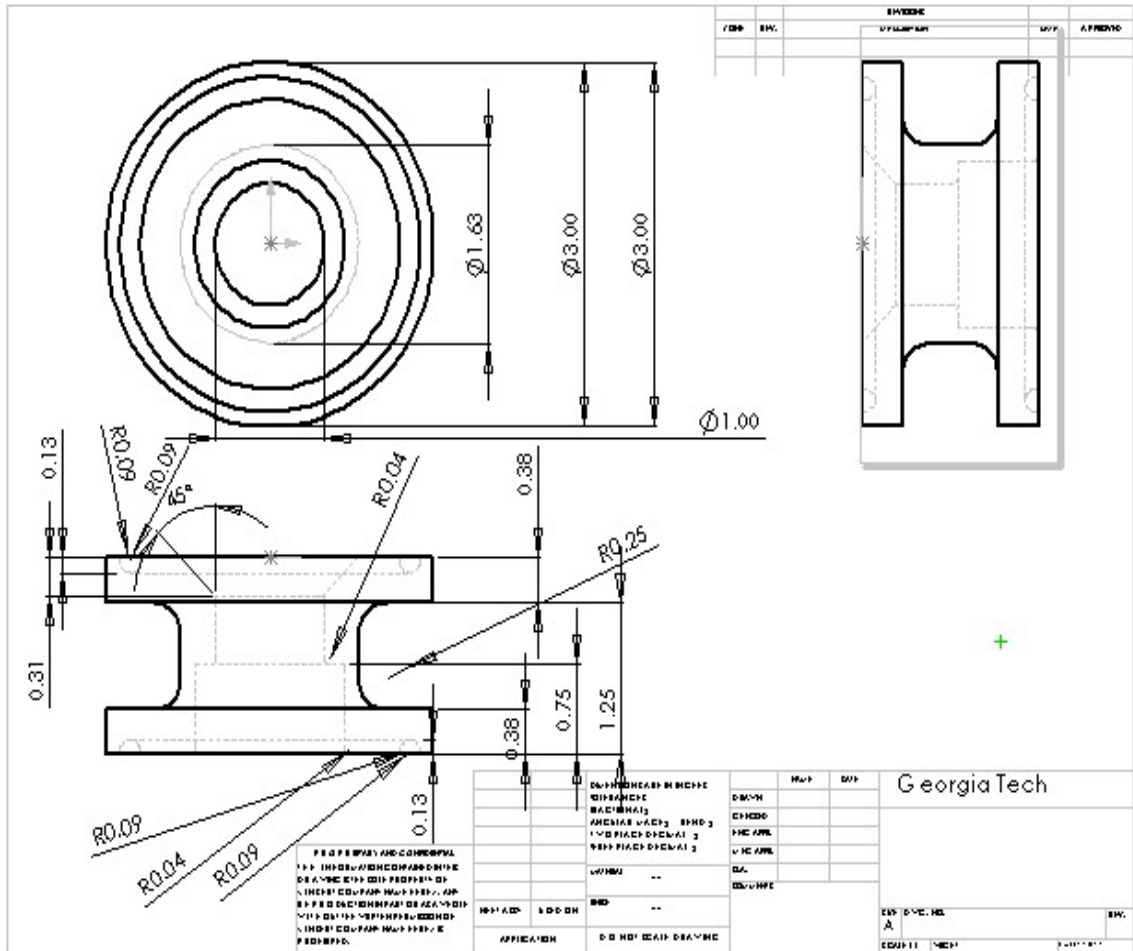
Drawing shows center component of the aortic valve holder. All dimensions are in inches.
